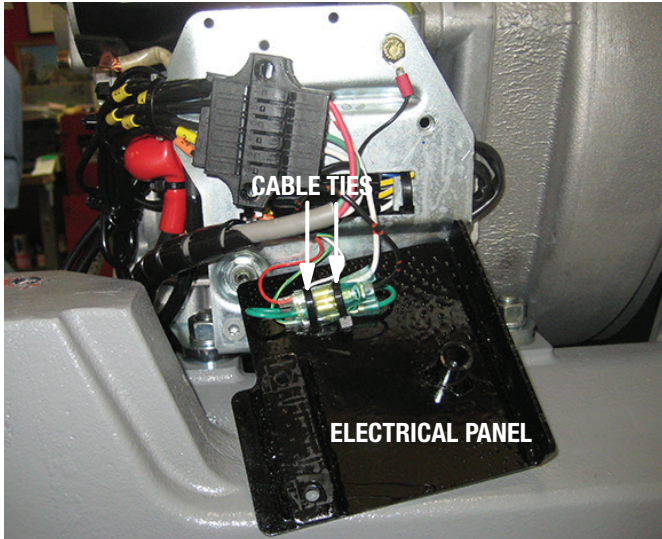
Cable Tie and Electrical Panel Removal (MVH508DZ)
